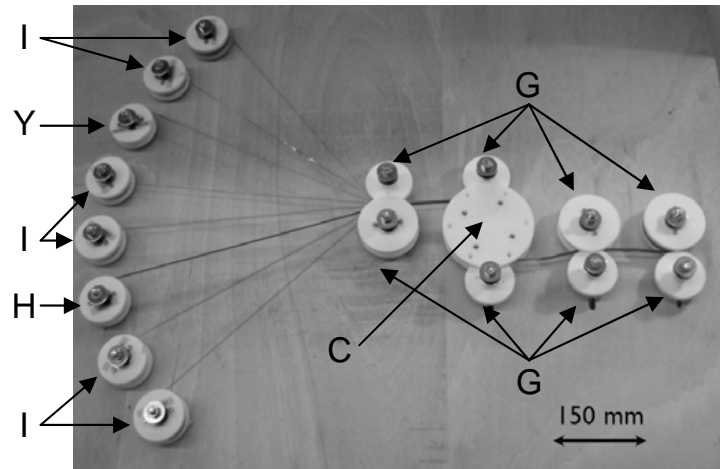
A machine for assisting with winding the multilayer bypass-switches. I indicates spools of insulation; H, spool of steel tape; Y, spool of YBCO tape; G, guides; C the coil. Friction brakes were mounted on each axle.
